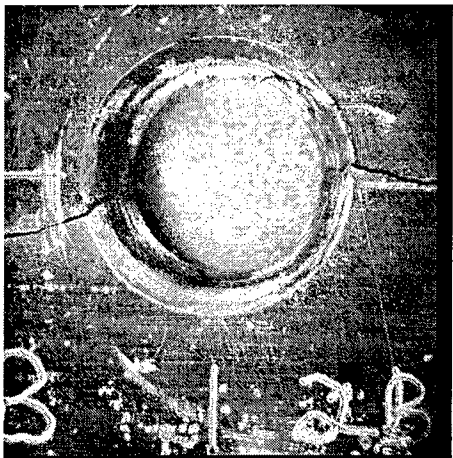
Countersunk rivet hole in non-corroded MSD specimen with typical fatigue cracks
